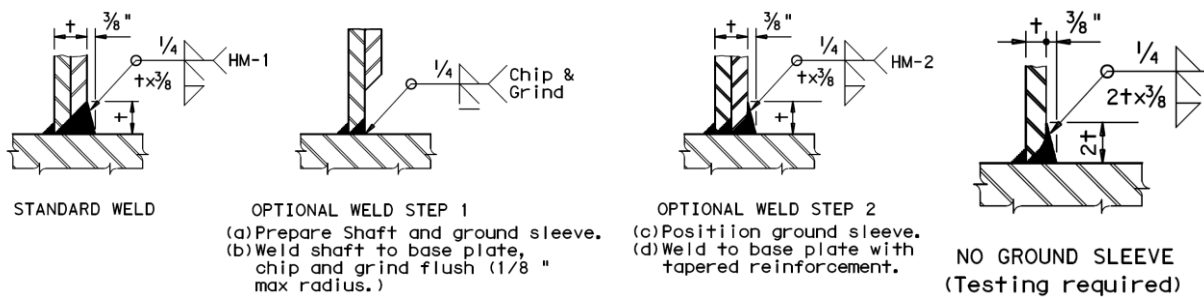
Shaft-to-Base Plate Weld Details for Texas HMIPs (TxDOT Standard Drawing HMIP-98)
